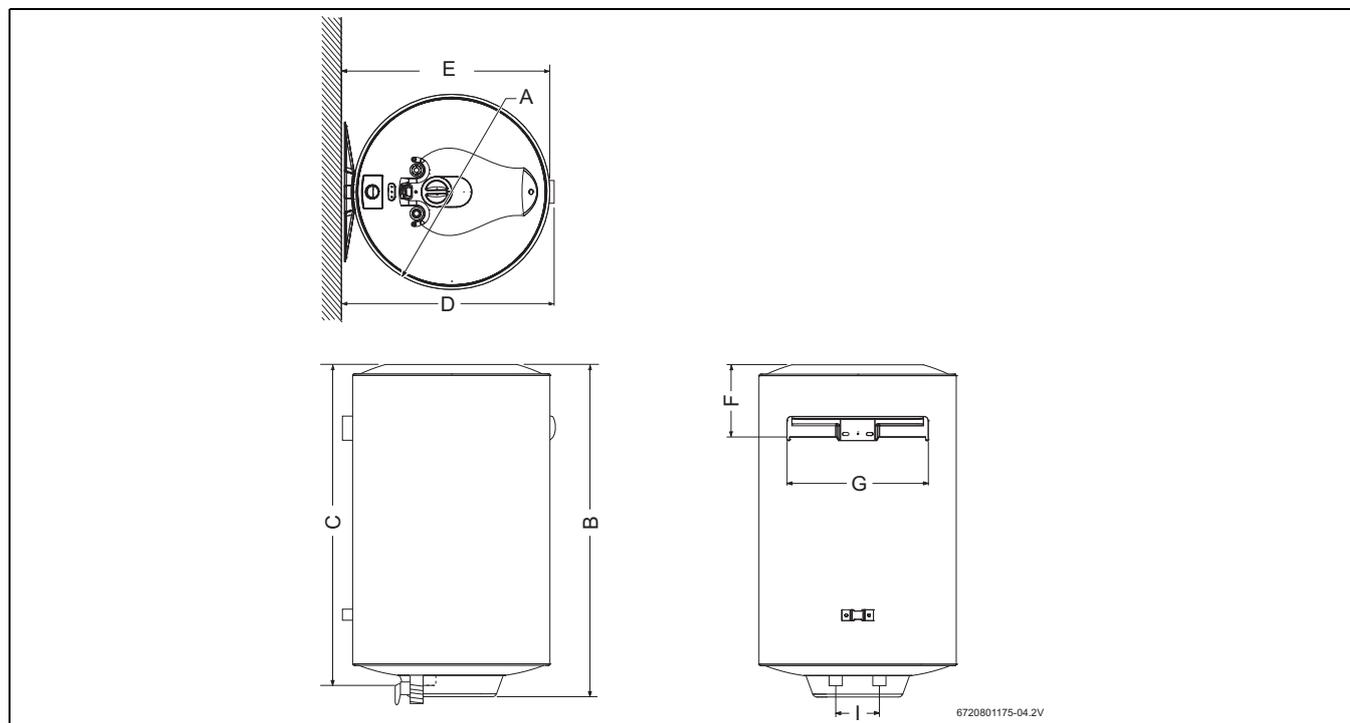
Dimensions in mm (ES035/050/080/100/120-4...)
